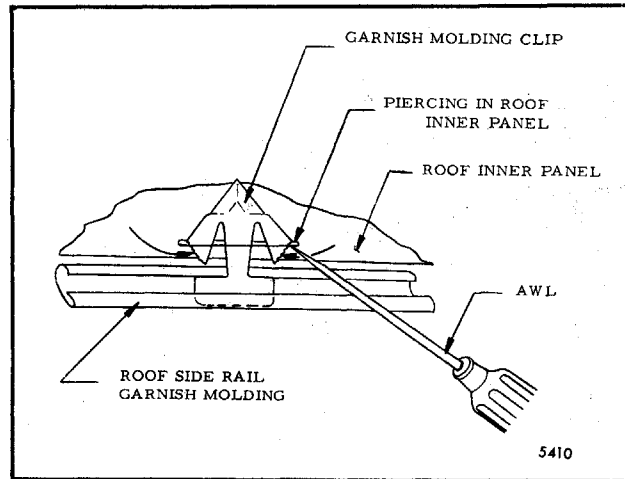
Roof Side Rail Garnish Molding Attachment - "E" Styles Typical
